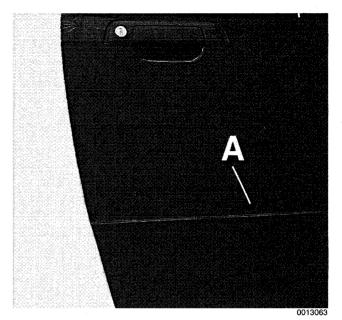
Using 4mm Allen socket, reach through rear bore hole (A) in door to remove window guide bracket bolts. (Exterior door molding has been removed.)
